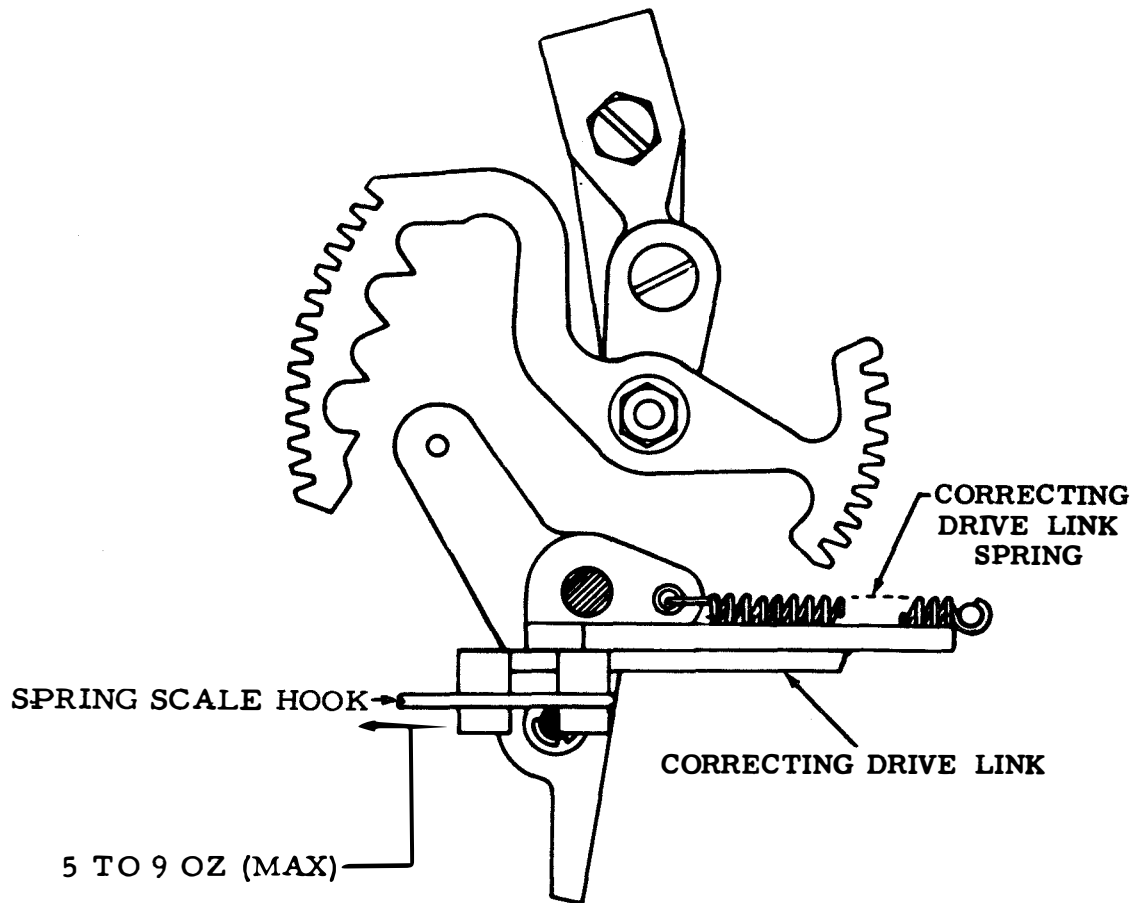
Correcting Drive Link Spring (Nonyielding) - Top View
